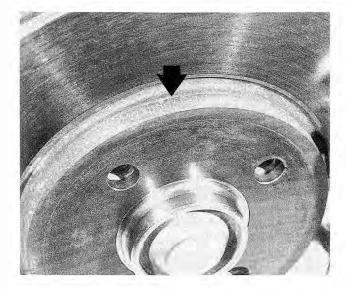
Front rotor minimum dimension stamped on rotor hub (arrow).
